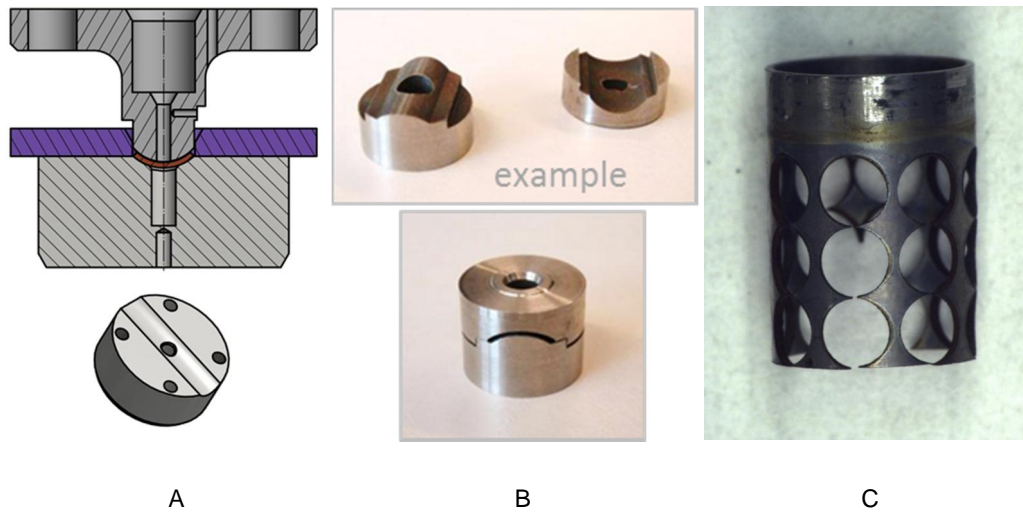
A) HZDR sample holder, Receiving hole radius $R=1$ mm, B) JRC-IET sample holder, $R=2$ mm, C): CIEMAT; left over tube after EDM specimen extraction.
